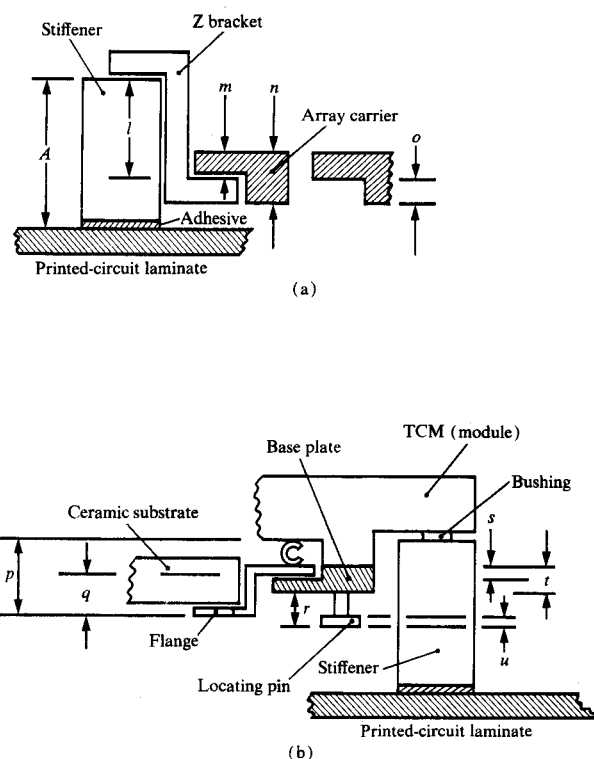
Key dimensions: Detailed sketches of (a) the array carrier and (b) the module indicate the critical dimensions which ensure engagement and noninterference during insertion and actuation of the array.
